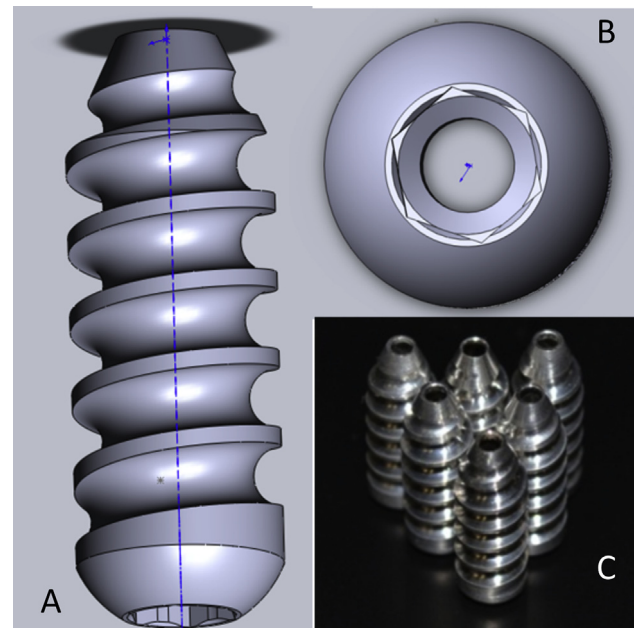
(A) The SolidWorks model of the interference screw with a 15 mm length, 5 mm diameter, an inner diameter of 1.73 mm (cannulation), and a 2.51 mm hexagonal drive with a 3.10 mm drive depth (B) Top view of the SolidWorks model. (C) The actual Mg-based interference screws manufactured with Mg alloy AZ31.
